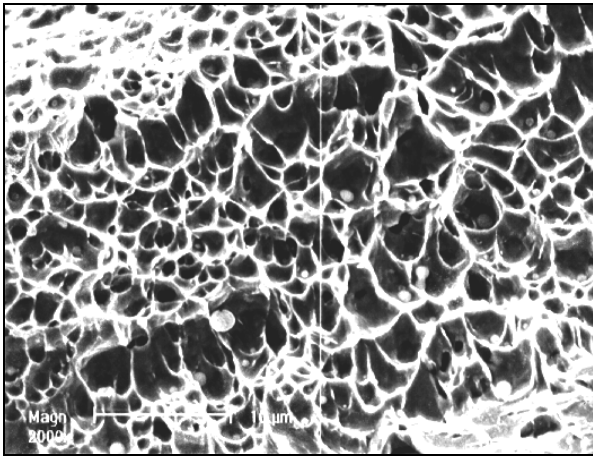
Fracture surface of metal weld deposit with 0.4%Mo
